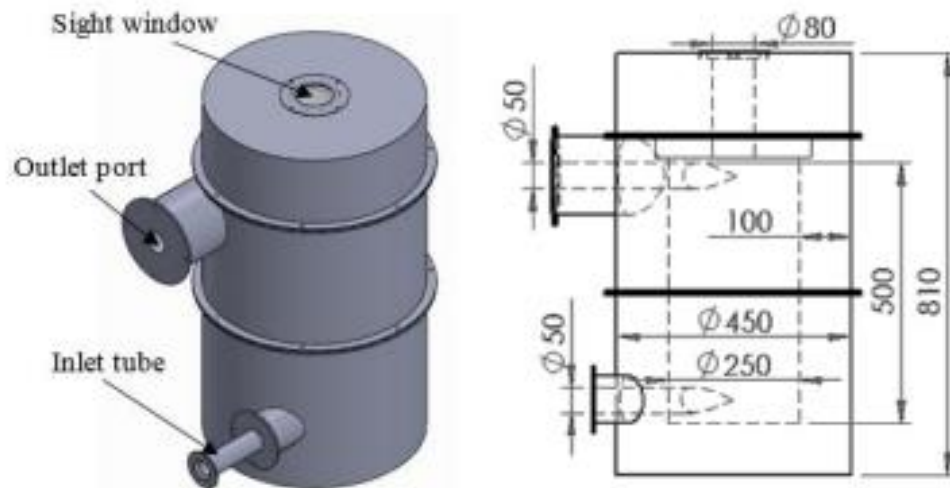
Premixed cyclone combustor model & schematic dimension in mm
